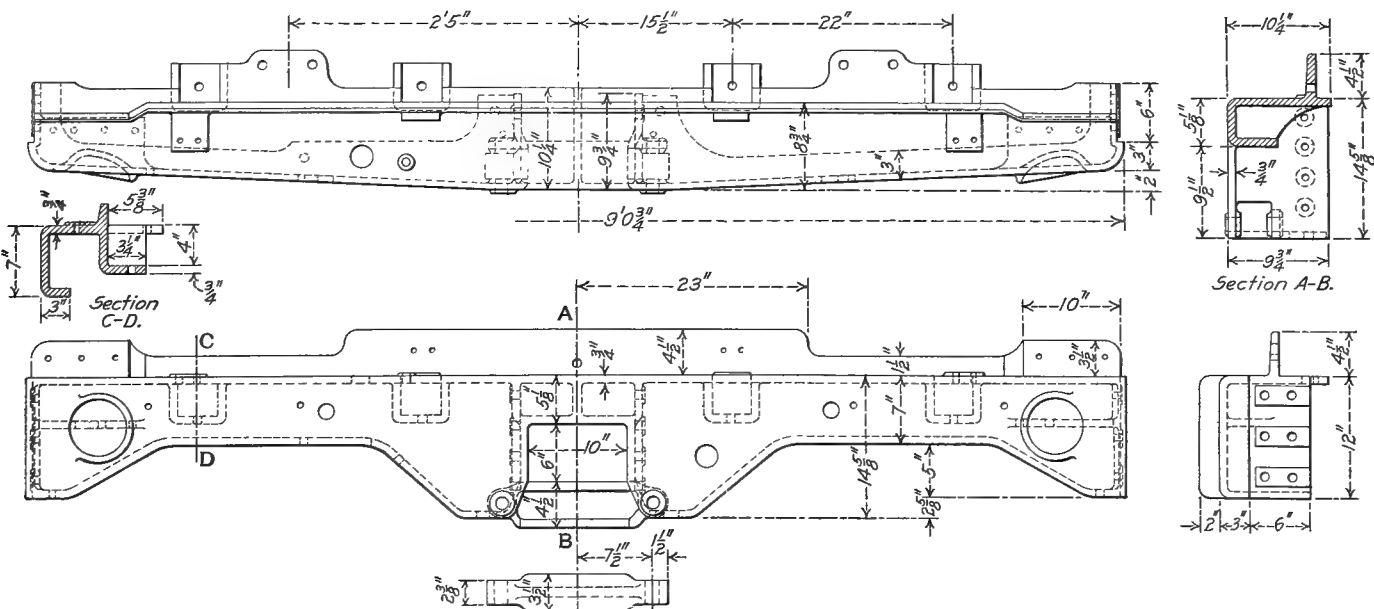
Arrangement of Cast Steel End Sill for Central Railroad of New Jersey Steel Underframe Gondola Car Shown in Figs. 58 and 323.
